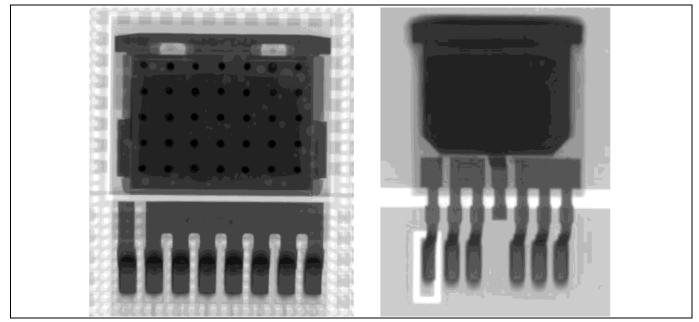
Typical X-ray image of a soldered HSOG-8 (left) and of a TO263-7 SMD package (right).
